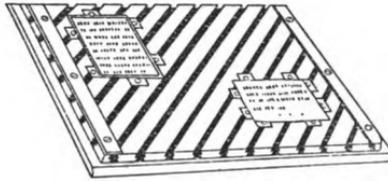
Grooved Steel Base in job press chase. (Note the roller bearers screwed on ends of the base.)
